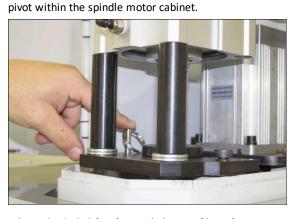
Quick-release pin inserted into the Power Drawbar cylinder's mount plate.
